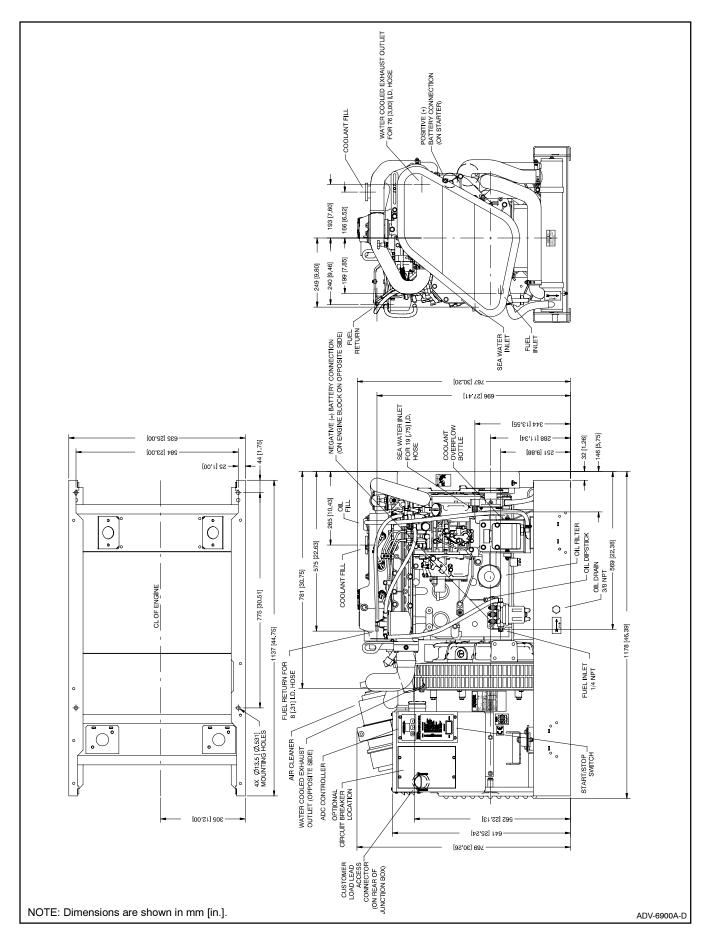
Dimension Drawing, 28/32EOZD and 23/27EFOZD
